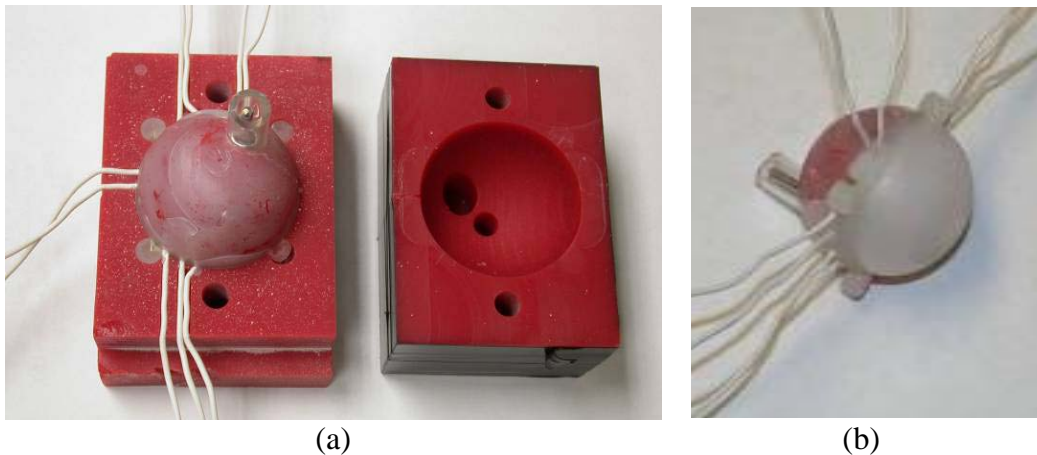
(a) completed second stage part and mold, (b) completed part, bottom view
